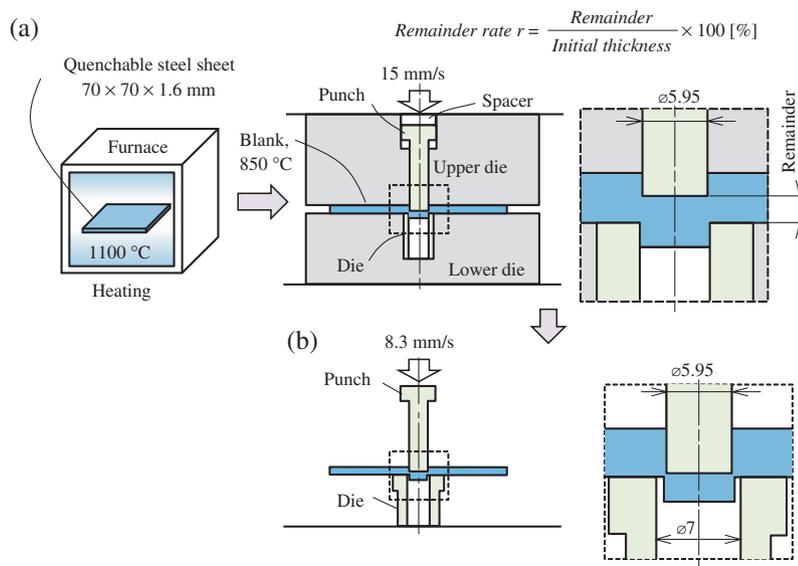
Experimental setup of (a) hot semi-punching and (b) cold scrap removing.
